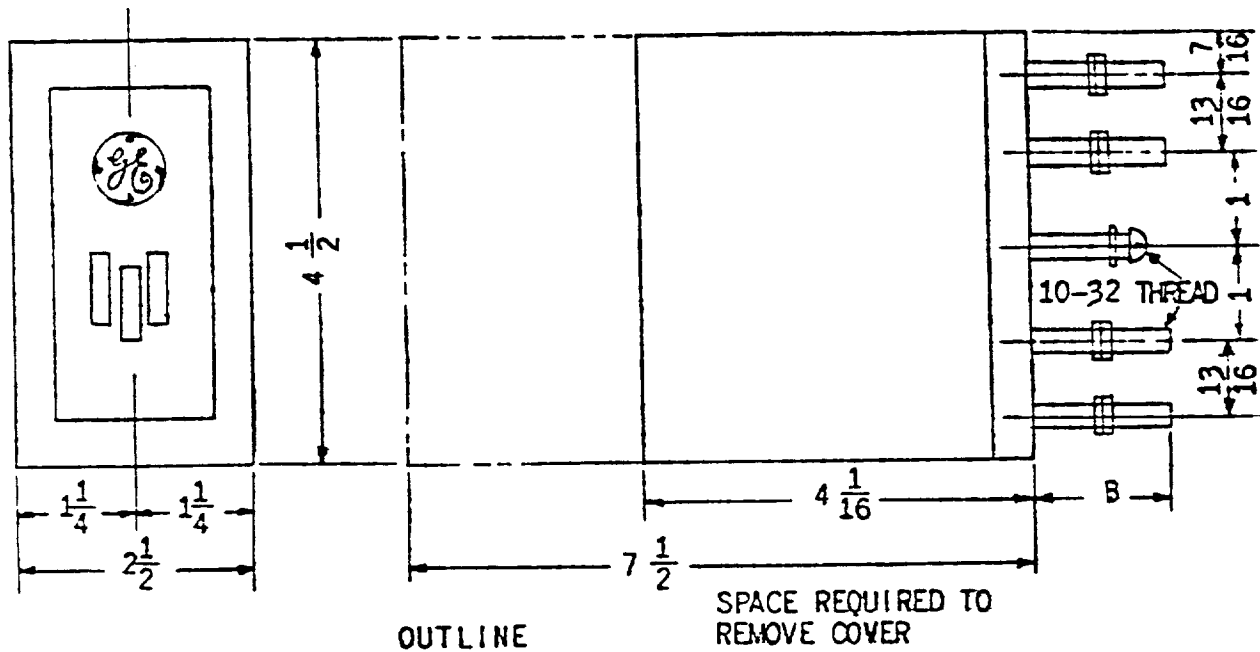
(6077058-20) Outline Dimensions for the HGA14A Relay
